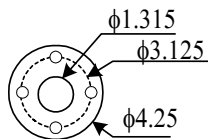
Schematic Diagram of Pool Boiling Test Section –Condenser Tube
